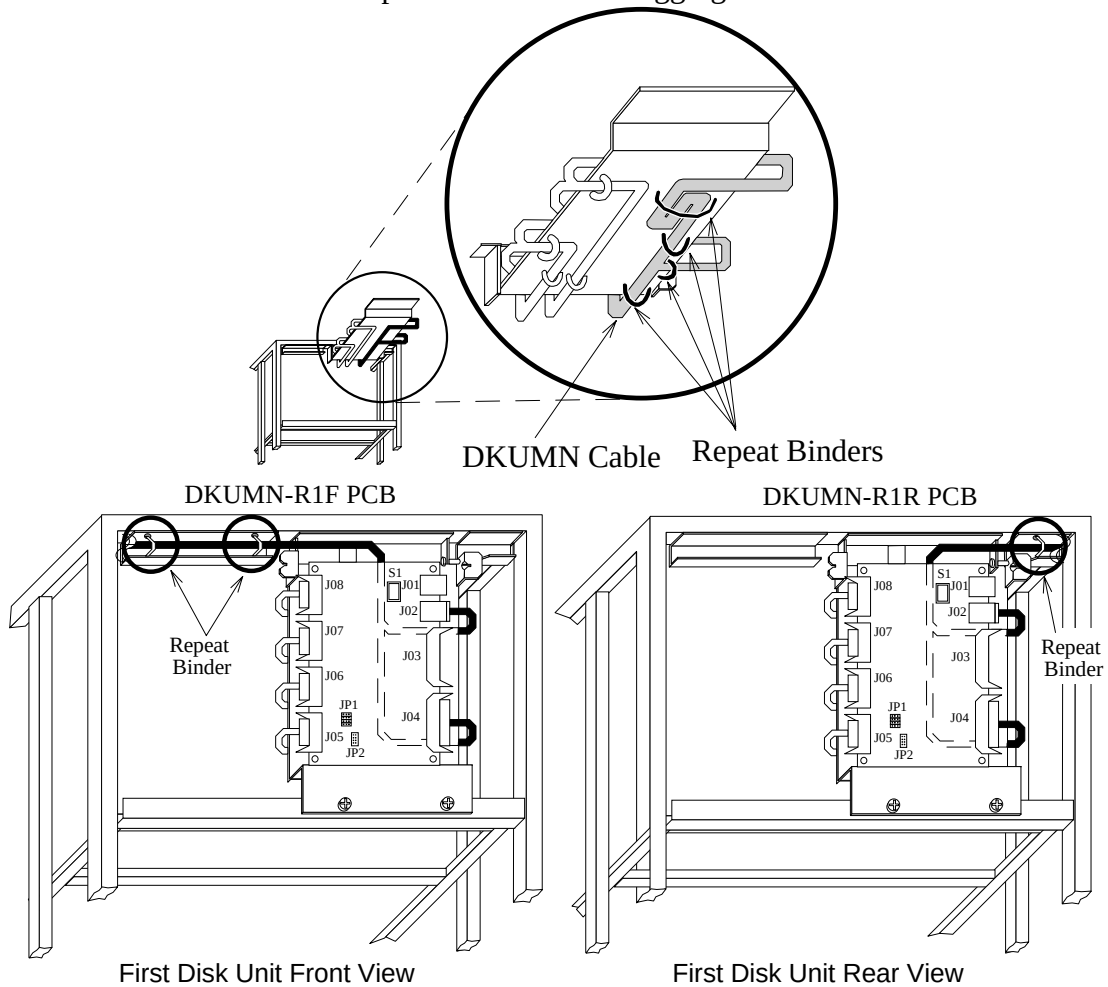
Binding of DKUMN Cables
